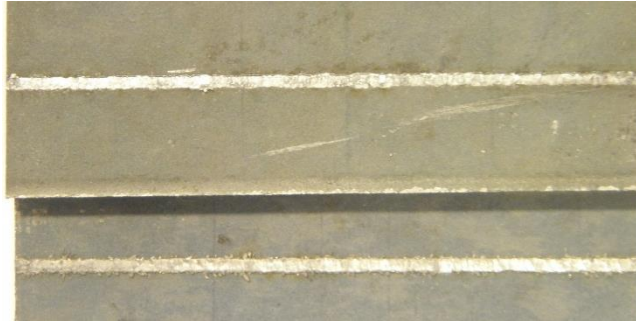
Shearing of weld seam of the joint 2 mm on 2 mm 22MnB5 Al 150 Ph
